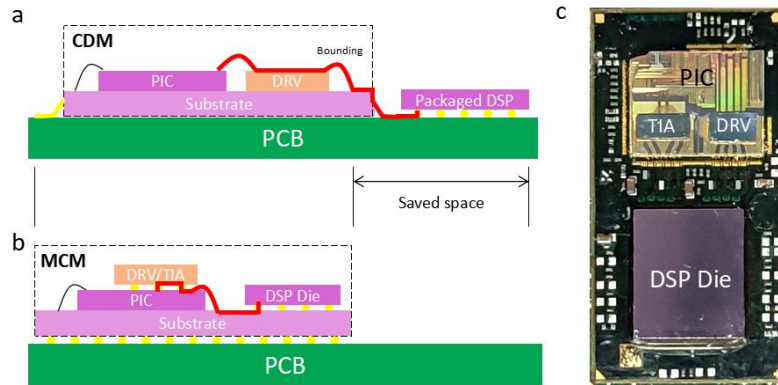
SiP Optical Component Packaging (a) CDM Packaging (b) 2.5D MCM Packaging (c) MCM Photo
